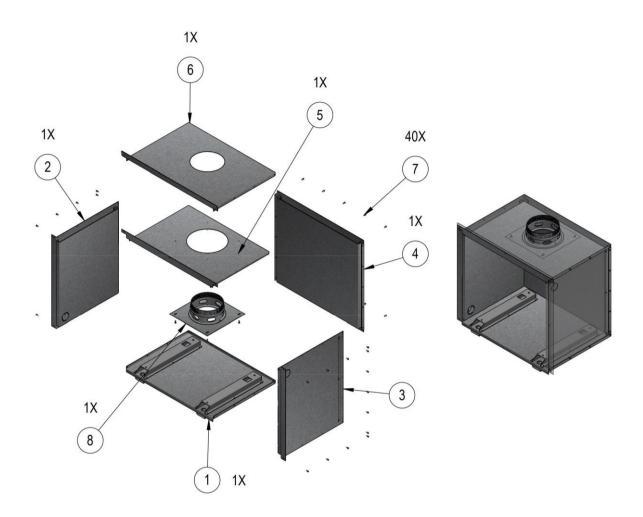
FIG H - XANDER WOODBURNER ZERO CLEARANCE ASSEMBLY
